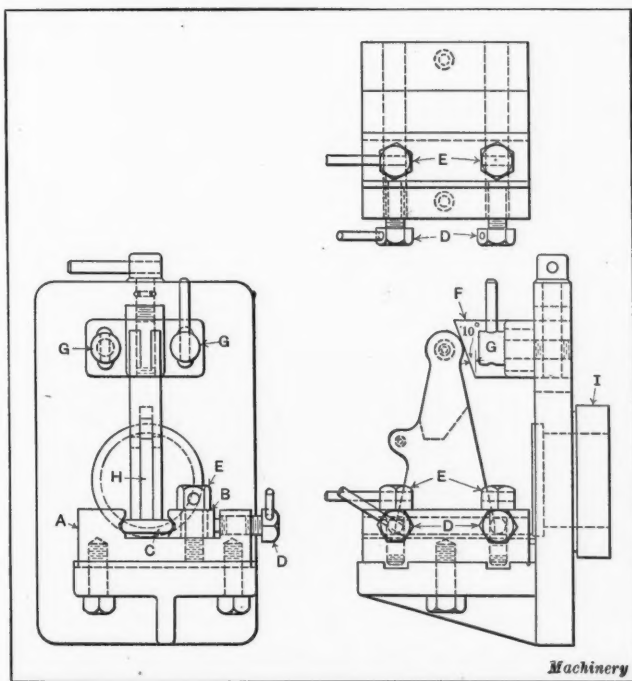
Work-holding Fixture used for broaching out the Cored Hole shown at *H
